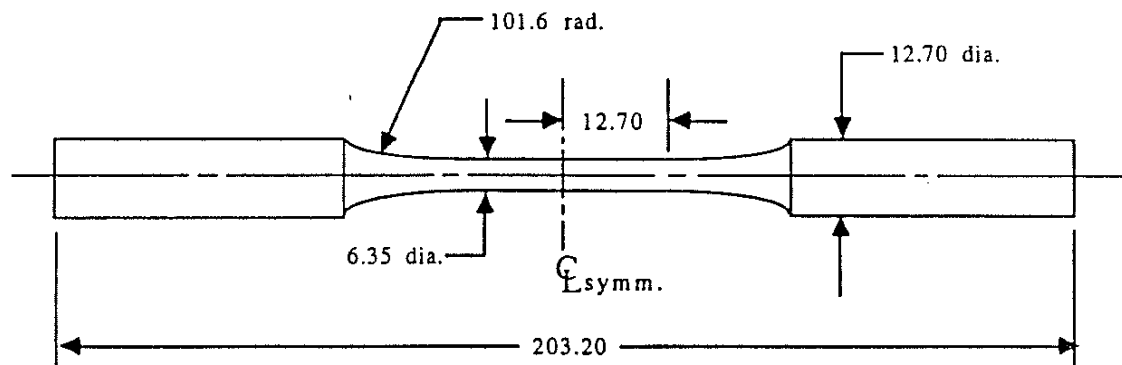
Geometry of tested specimens. (All dimensions in millimeters)
